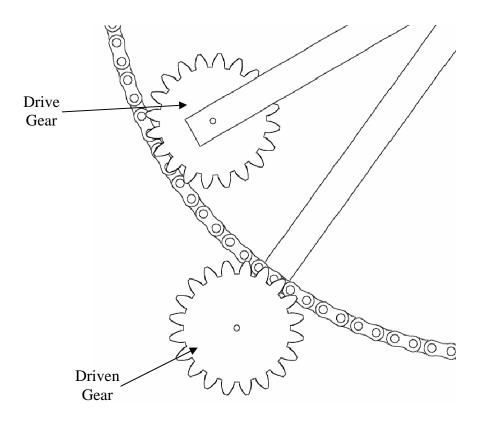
Misalignment of Drive and Driven Gears Due to the Non-Integer Tooth Problem
